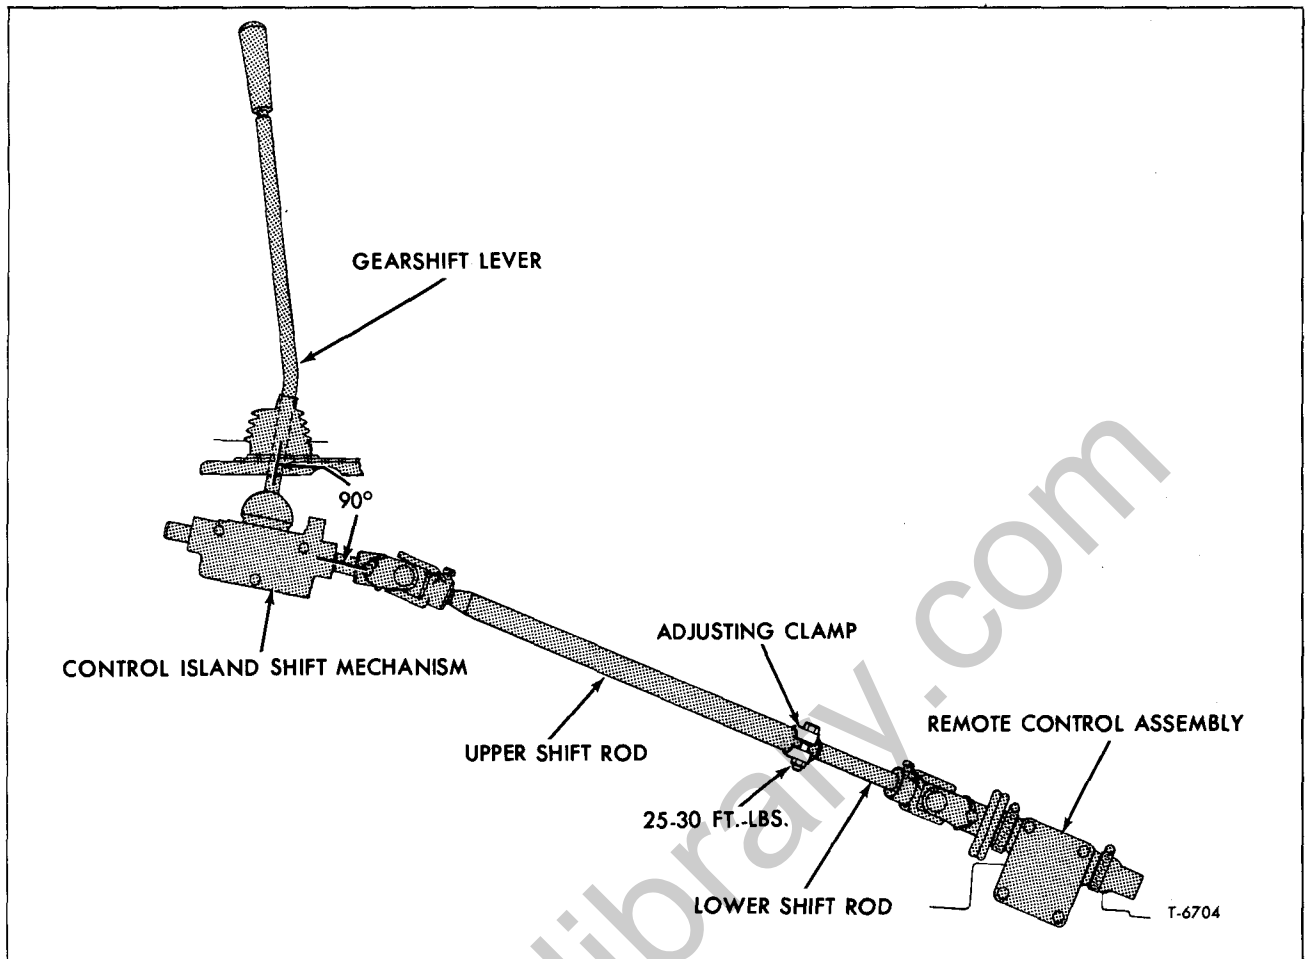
Tilt Cab with Two-Piece Shift Linkage (90 Series)
